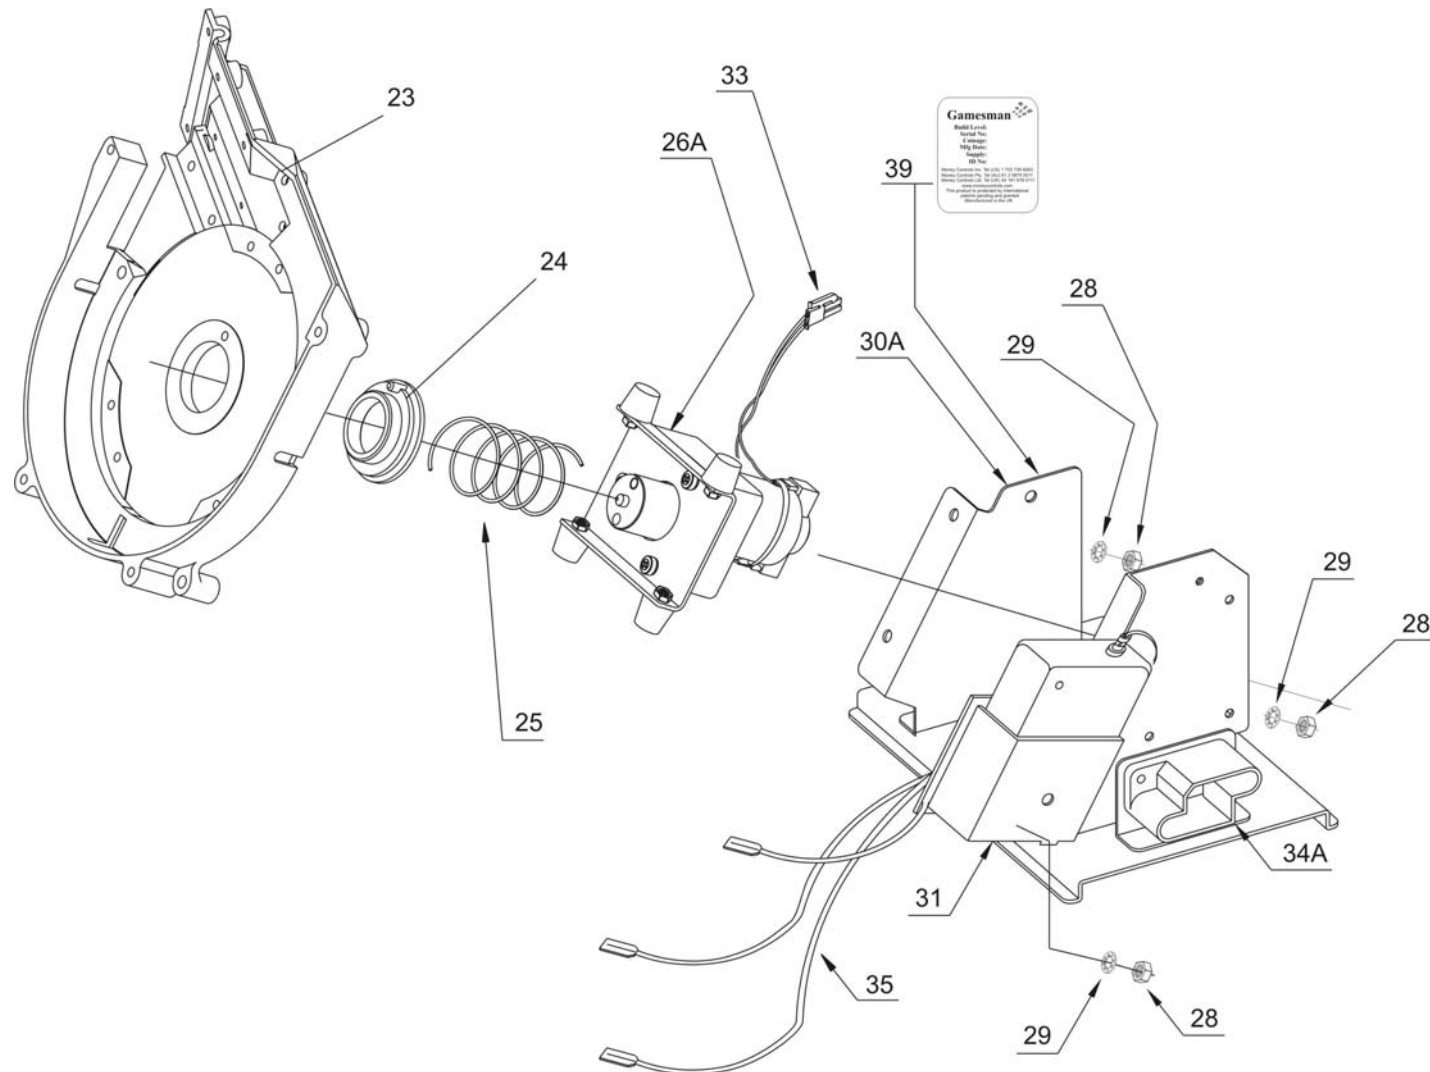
Exploded Drawing – DC Motor, frame and base assembly
